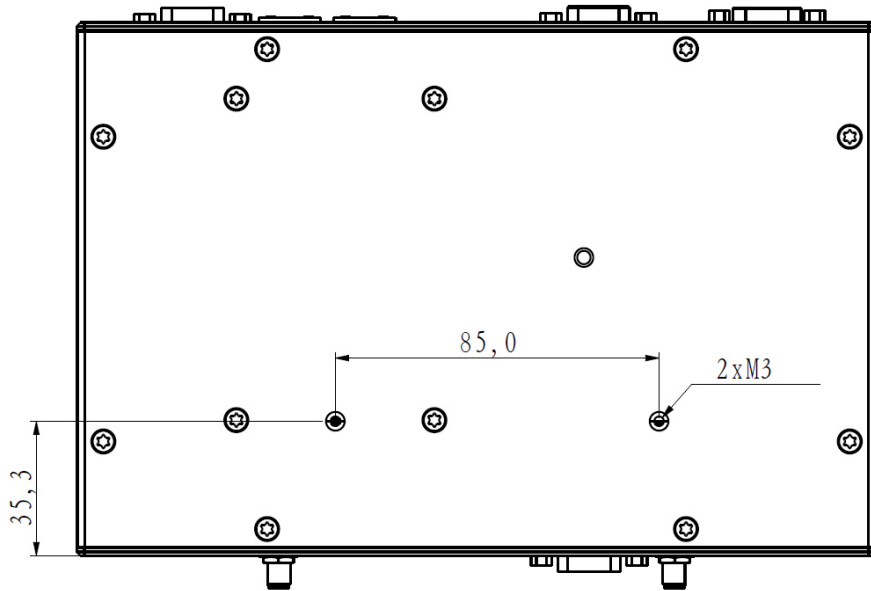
Dimensions in bottom view (by use of the DIN Rail clip)
